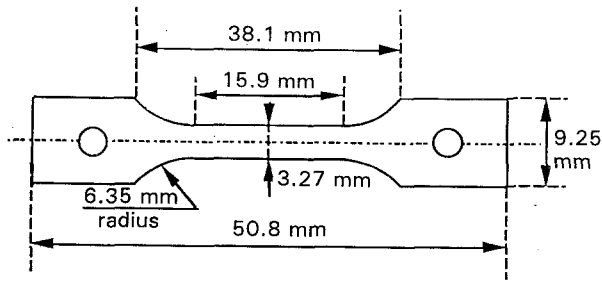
Schematic drawing of the thin sheet test piece used for tensile testing.
